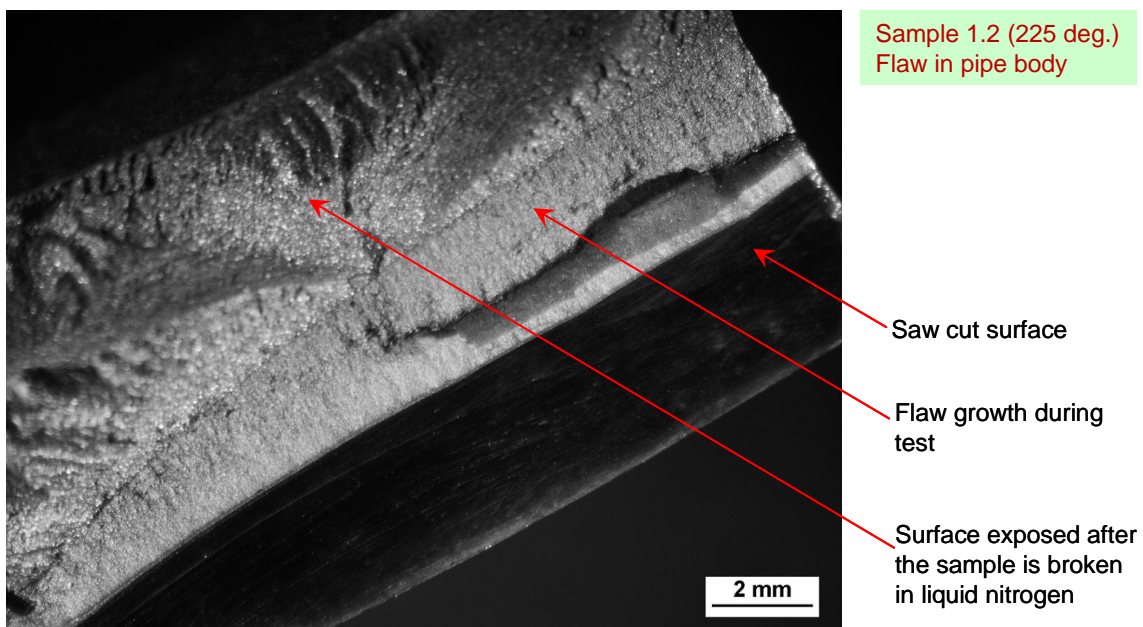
Fracture surface of a flaw located in the pipe material
